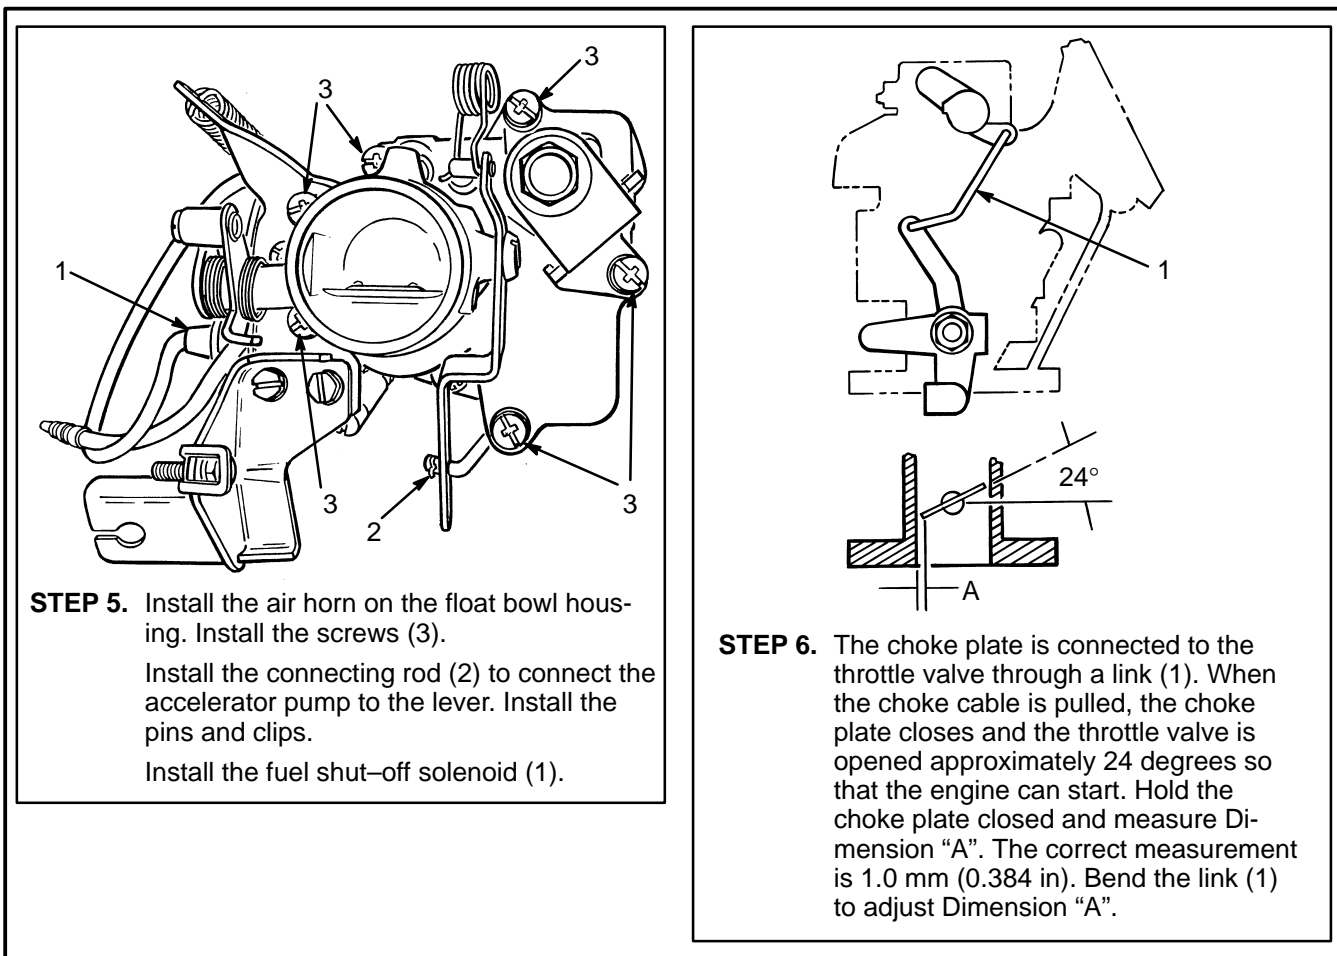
ASSEMBLY OF THE CARBURETOR (2 of 2)
